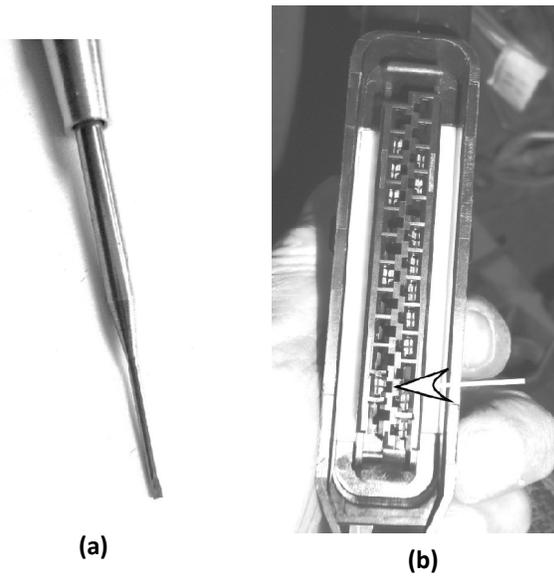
(a) I used the smallest head (0.94 mm, slightly larger than 1/32") of my jeweler's screwdriver set to remove the Hall cable wires from the prong socket. Another suggestion was a finely ground pick. (b) To free a connector, insert the miniature blade into the channel shown by the arrow (which is back side of connector) while gently pulling on the wire from the back. Make sure that the plastic inserts of *Figure 19* have been removed. (In this photo, the inserts are still present.)
